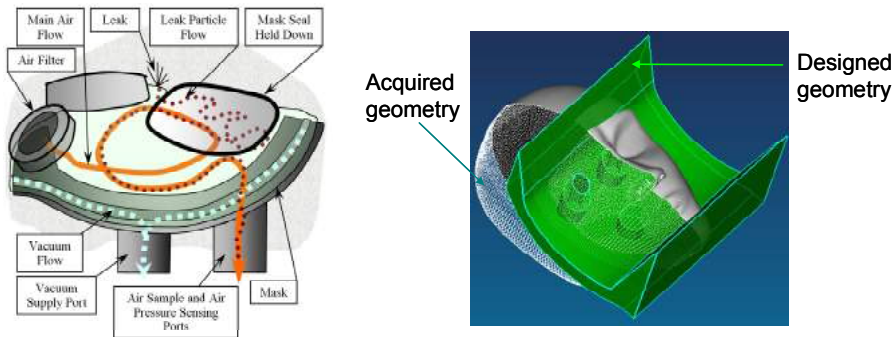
Designing and manufacturing of a customer-specific headform: (a) Physical mask, (b) Acquired head model and the designed mask template.
